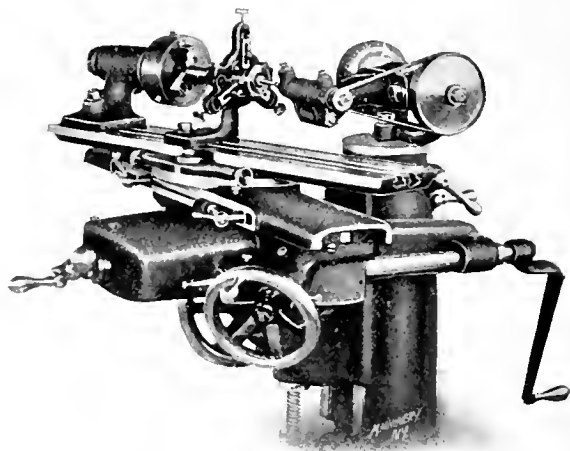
Grinding a Taper Hole in Spindle, with Internal Attachment.
